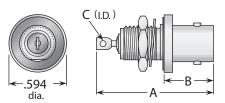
(Front mount, hermetically sealed, with mounting gasket)
